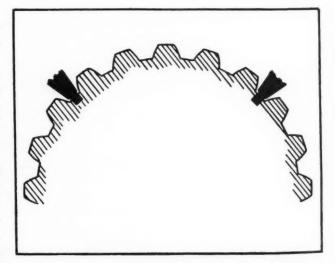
Cross-sectional Diagram of Broach and Guide Inserts which Engage Grooves in Broach
